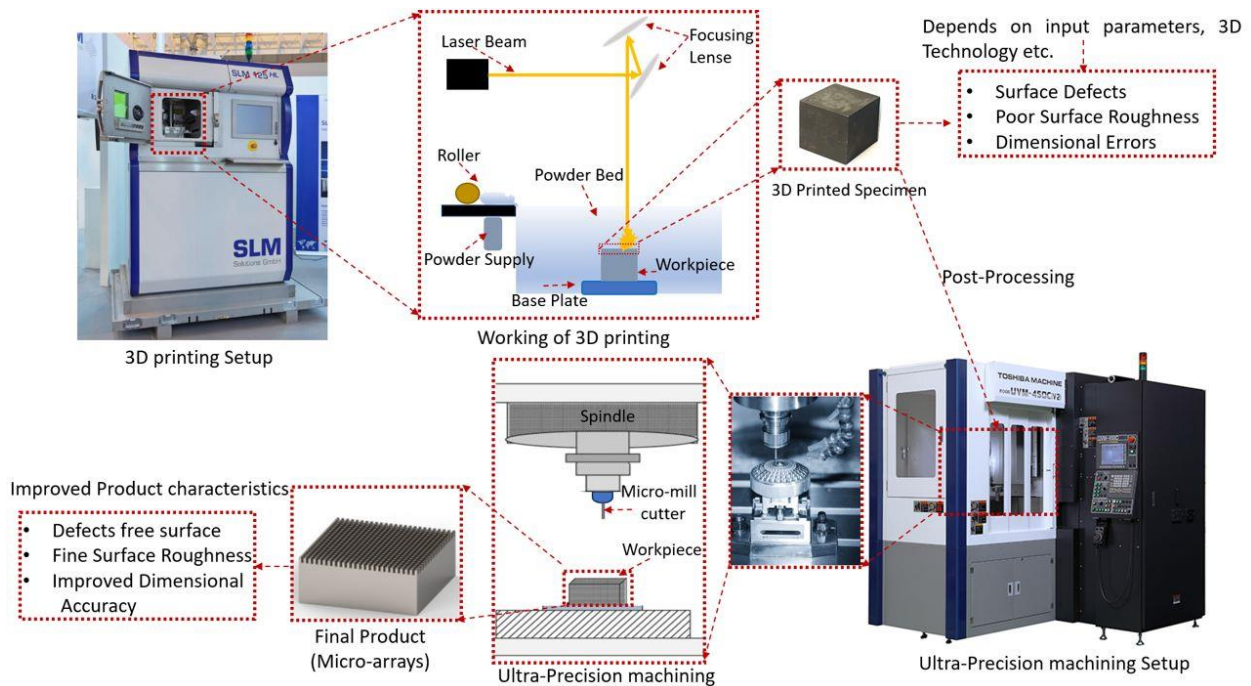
7 Combined manufacturing process (selective laser melting (SLM) and micro milling) [5]
